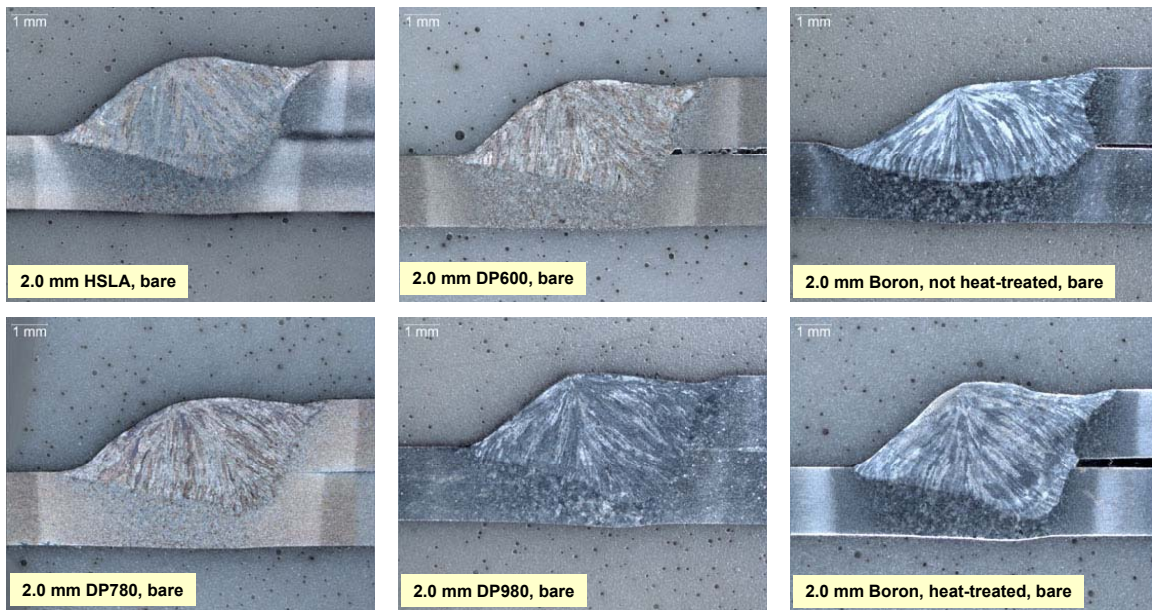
Cross-section view of weld profiles among different AHSSs.
